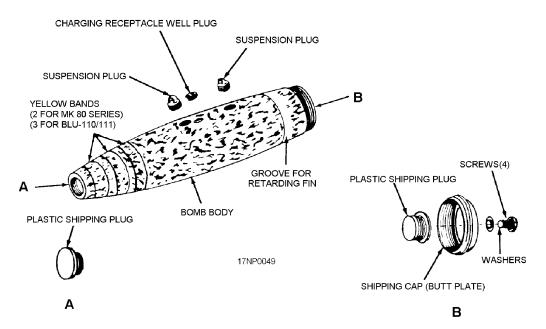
LDGP bomb Mk 80 (series)—exploded view (shipping configuration).
